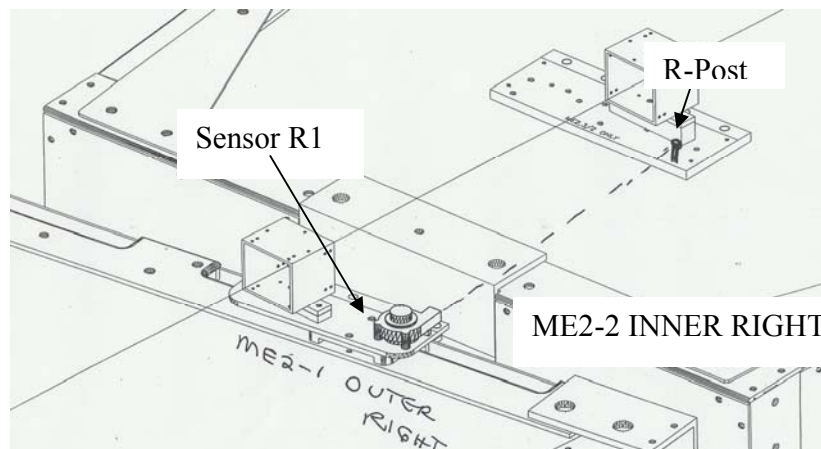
Close-up view - R1 sensor placed between the Inner Cathode Strip Chamber (ME+2-2) and the Outer one (ME+2-1) for the ME+2 disk. [10]
